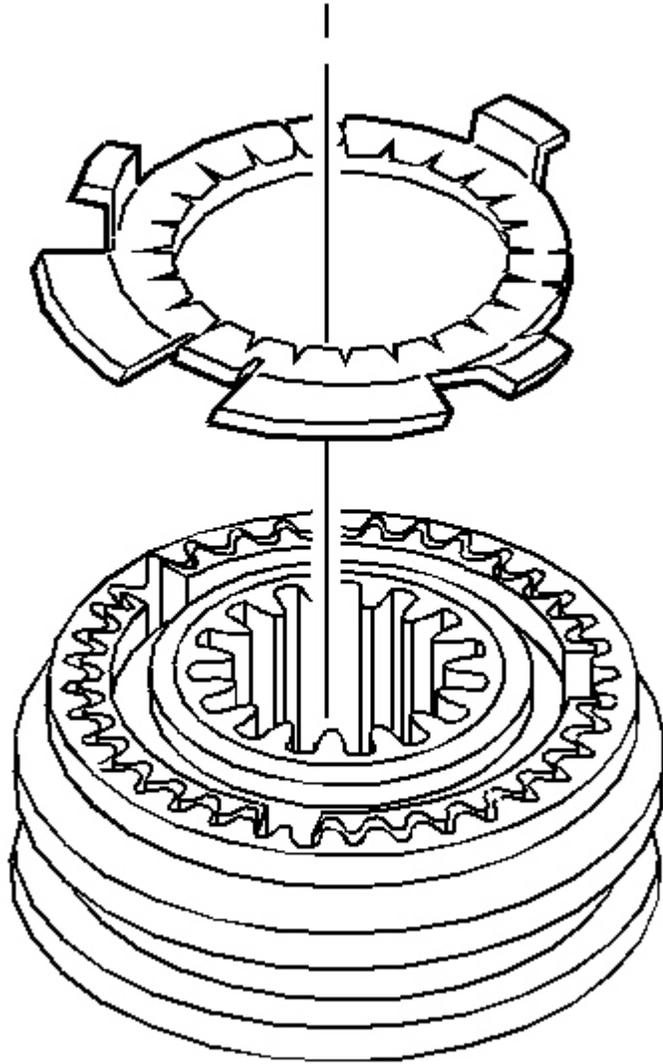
Aligning Synchronizer Key Retainer Tangs Over Synchronizer Keys
